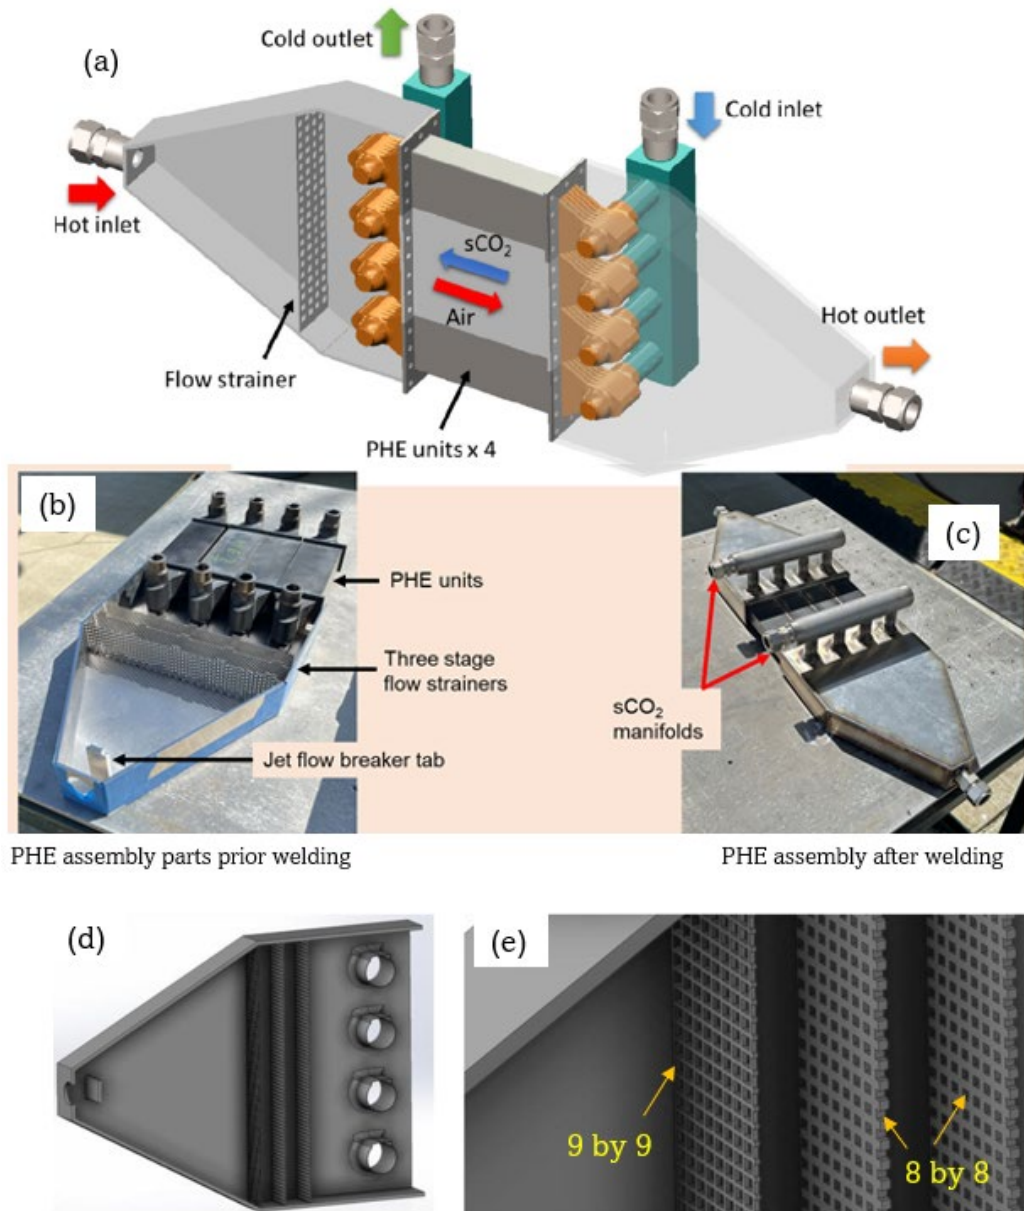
HE assembly: (a) Overview of the four-stack HE with side headers to carry the hot air stream in and out of the unit, (b) PHE assembly parts prior to welding showing the slow straighteners, (c) PHE assembly after welding the hot air headers and the sCO₂ manifolds, (d) CAD of the air header, (e) close-up view on the meshes used to straighten the flow.
